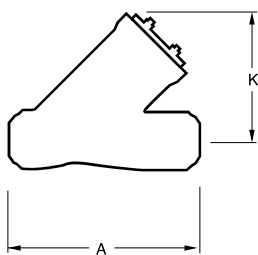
WE* Butt Weld Ends
